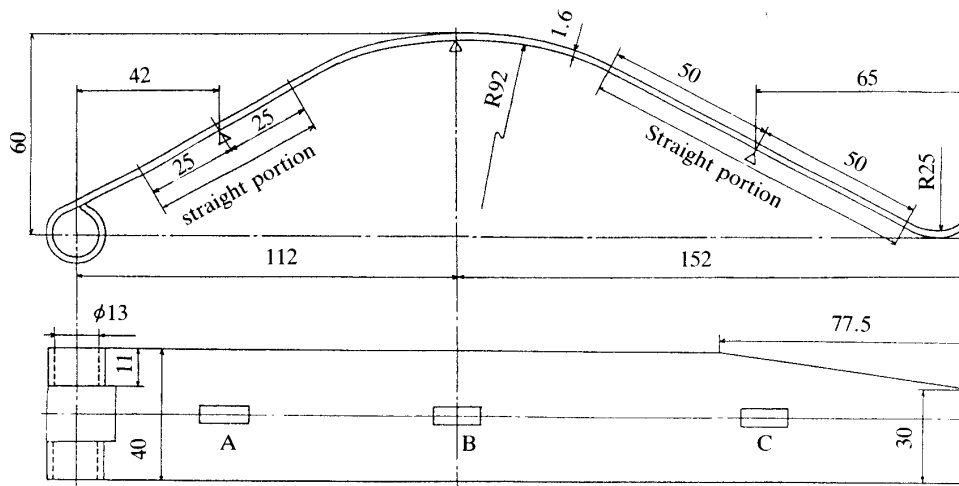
Sketched shape of the tested tightener and locations of attached gauges.
